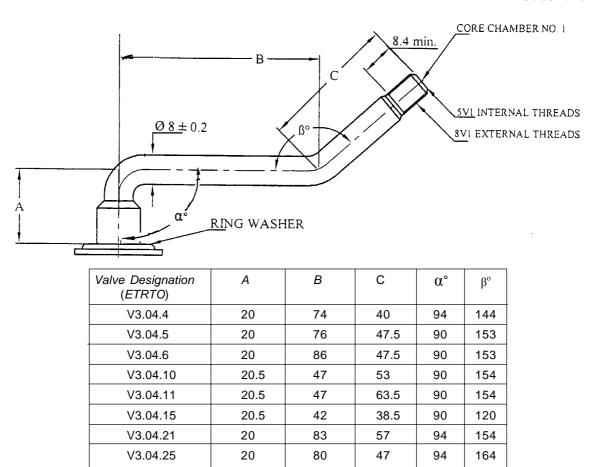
Screw-on Universal Tube Valve Spuds — Truck and Bus Valves
